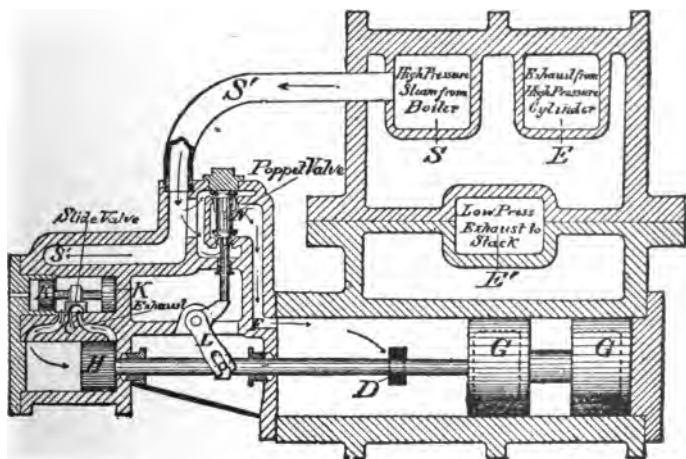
Intercepting Valve Closed—Engine Working Simple.
